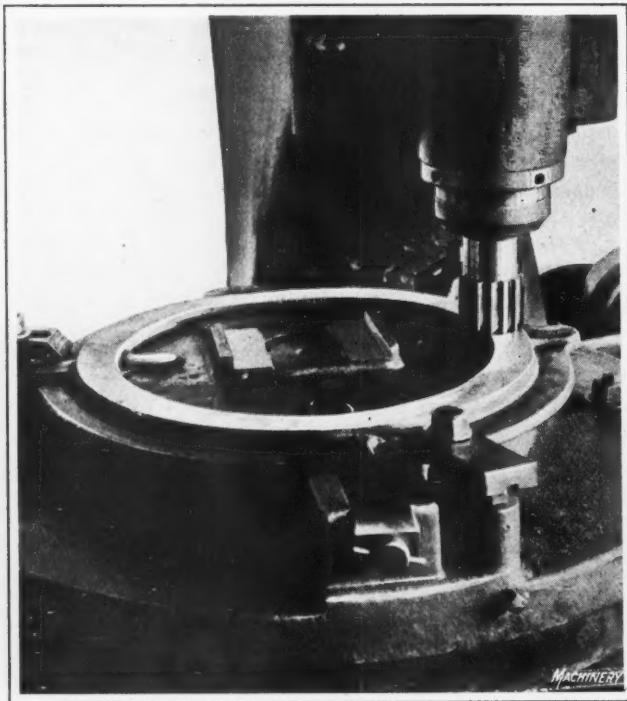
Solid End-mill, $1\frac{1}{4}$ Inches in Diameter, 14 Teeth, milling Cast Iron; Cutter Speed, 210 Feet per Minute; Table Travel, 54 Inches per Minute; Depth of Cut, $\frac{3}{32}$ Inch; Cutting Time, 42 Seconds; Pieces per Grind of Cutter, 380
